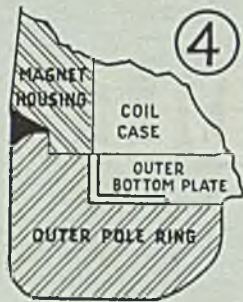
Detail of magnet designed for welding of outer pole ring to housing
